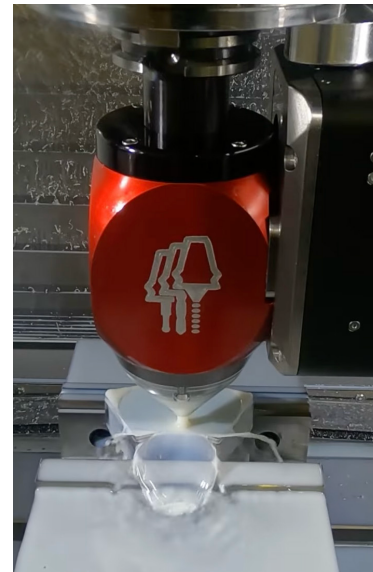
Hybrid machines co-locate digitally driven tools for adding, finishing, and now volumetric inspection
